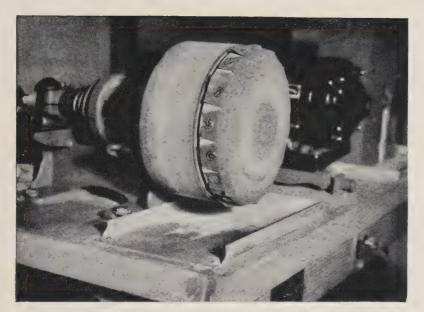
Sanding Drum and Sanding Disc Mounted on the Same Spindle. (Guards have been removed.)
